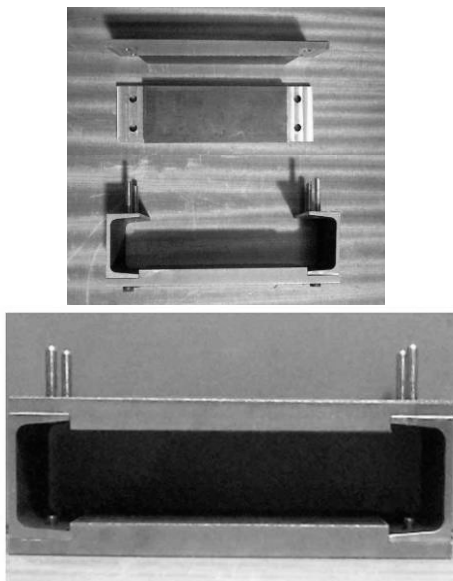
Steel components of C-core module (a) machined flat bar (b) flat bar screwed to 'C' channel sections and threaded bar (c) C-core module assembled without PMs.
